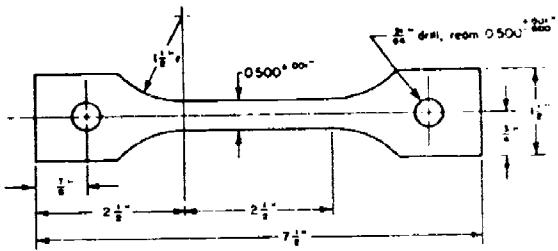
SHEET AND THIN-PLATE TENSILE SPECIMEN
